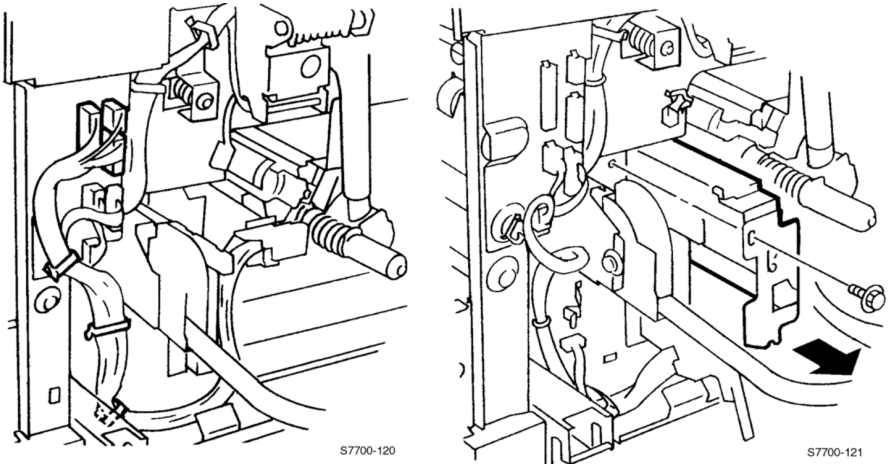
Waste Toner Agitator Motor Assembly.
